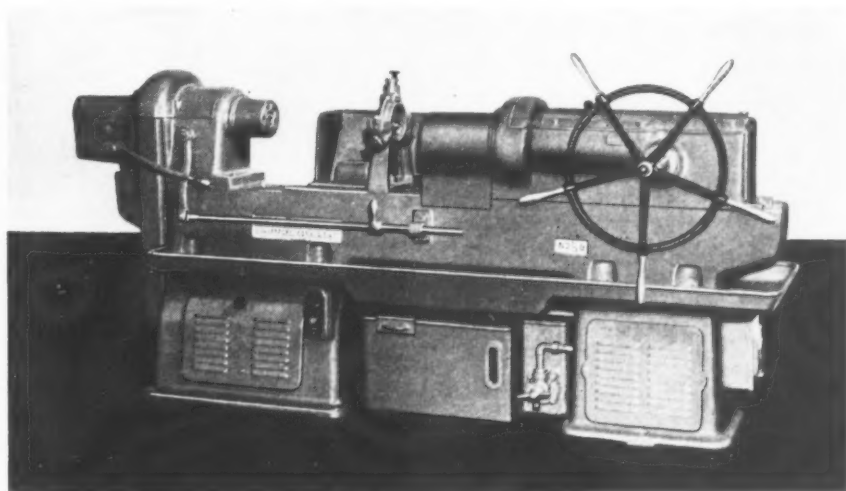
Pratt & Whitney No. 1/2B Gun-barrel Chambering Machine
